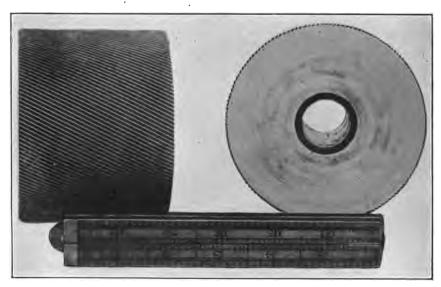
SPIRAL-CUT BURR, TWELVE TO THE INCH. (Advance 1½ inches in crossing 3-inch face.)
